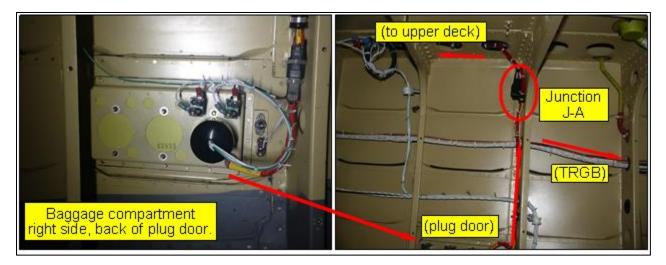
Example of junction J-A located on right side of baggage compartment above plug door. Refer to Cable Kit wire diagram drawing: 02861.
